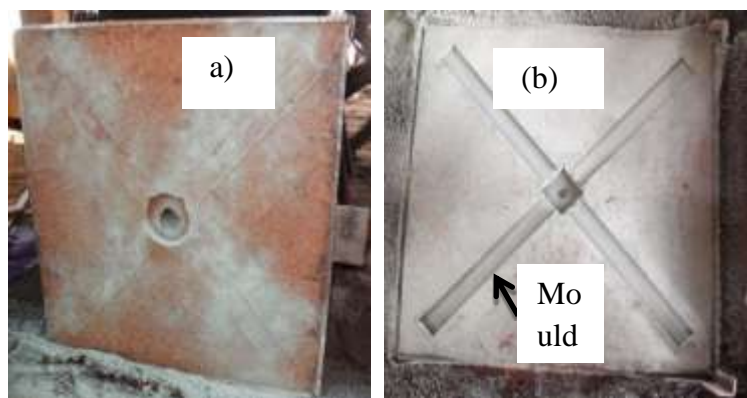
Green sand moulds for investigation of fluidity (a) Cope (b) Drag
